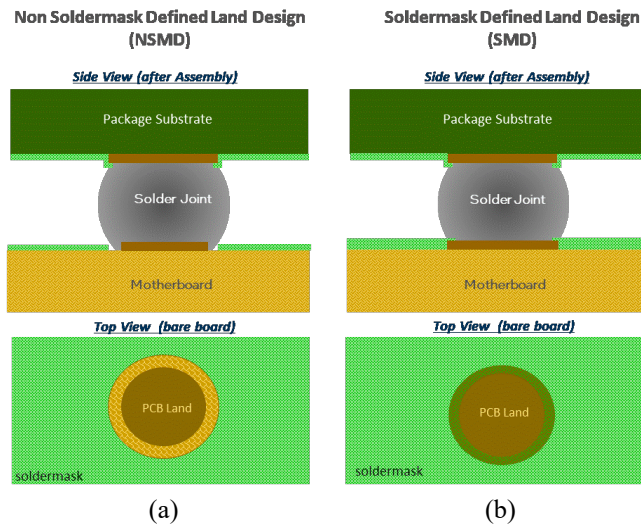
Two solder land designs are used in Intel tester boards. (a) NSMD Pads and (b) SMD Pads.
